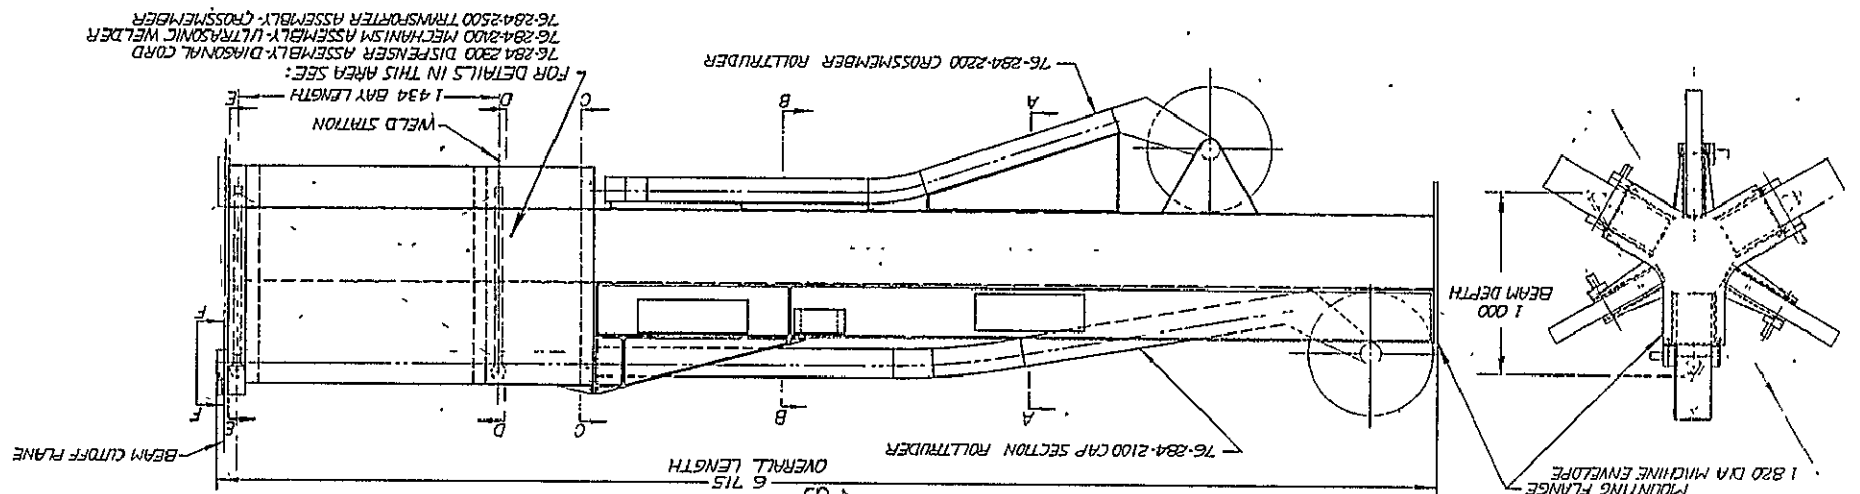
shows the general arrangement of the machine which will fabricate a continuous triangular beam 1.0 meter deep.
